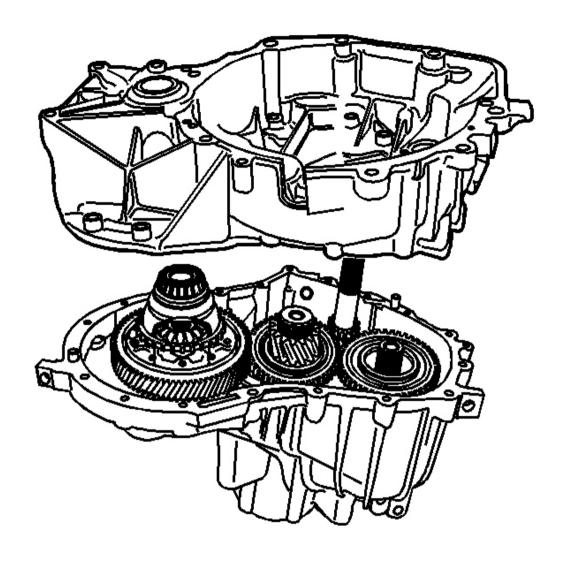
Clutch Housing & Transaxle Case Courtesy of GENERAL MOTORS CORP.
